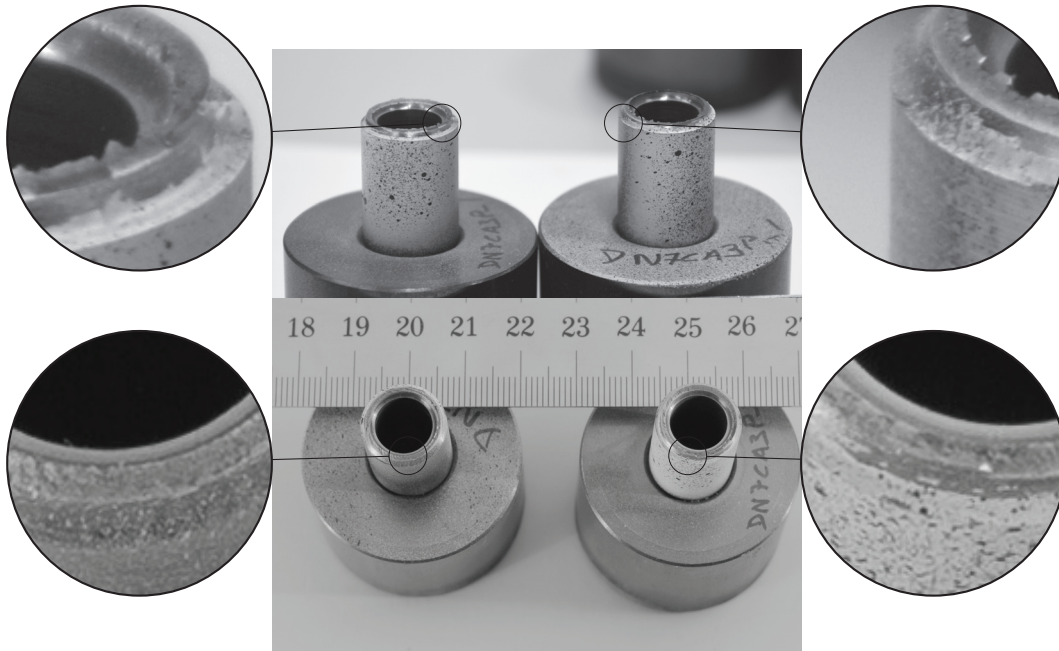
Fracture surface in cyclic for load path 3 in double notched specimens
